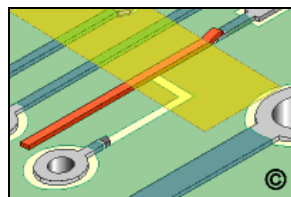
Place the new Circuit Track in position and hold in place with Tape.
